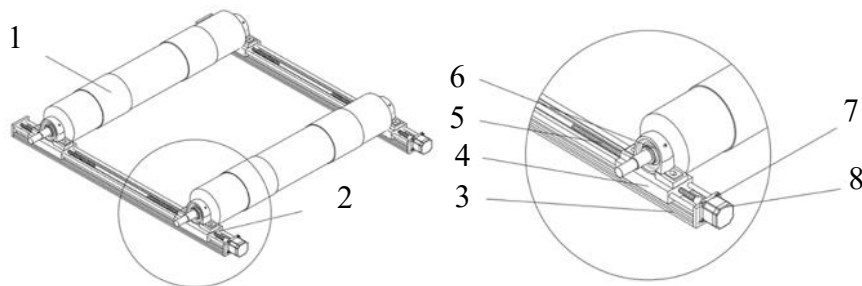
Structure diagram of adjustable rice straw bale wrapping machine
